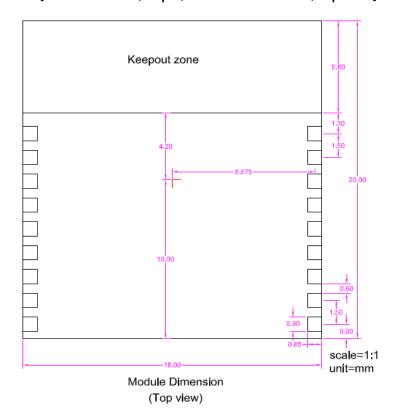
Top View of ESP-WROOM-02 WiFi Module
